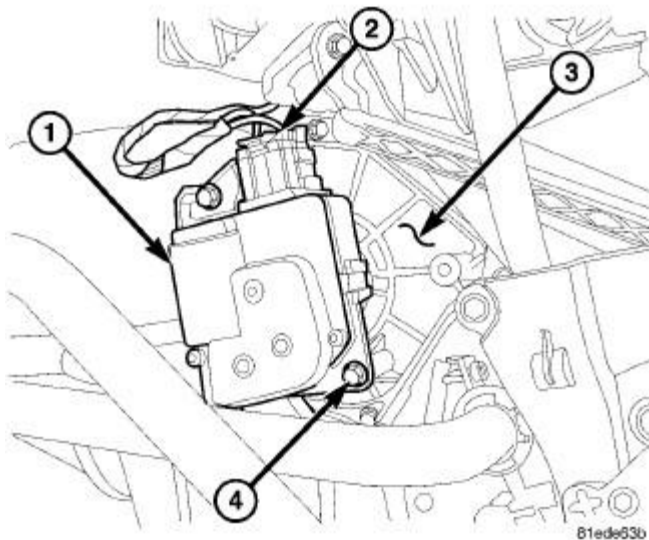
Actuator-Blend Door-Single/Dual Driver Removal & Installation
